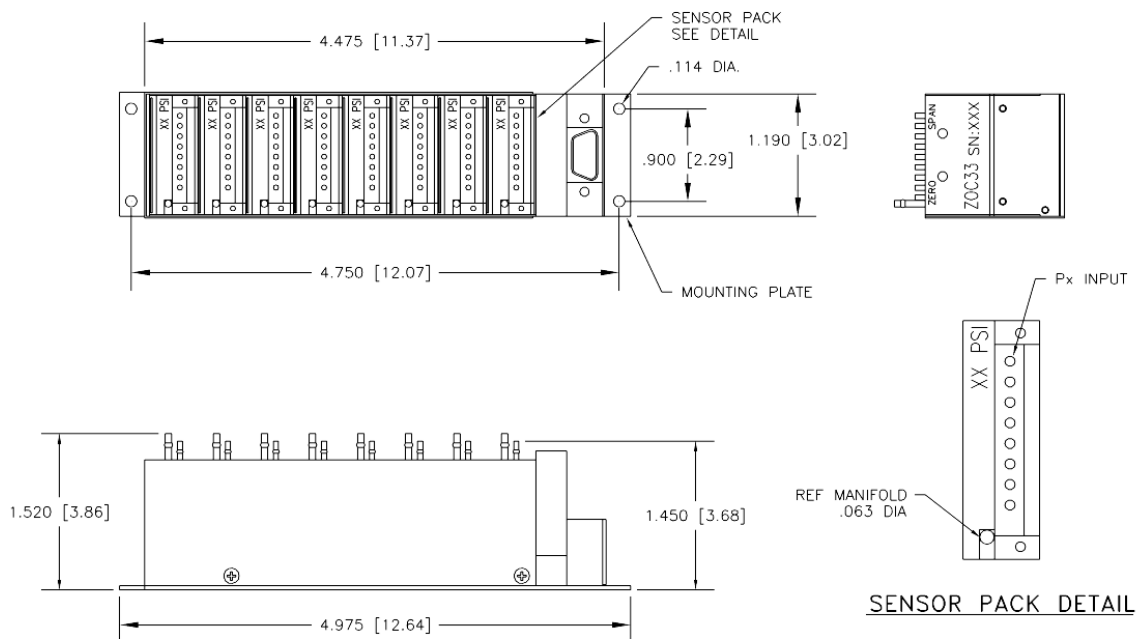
ZOC33/64Px VALVELESS DIMENSIONS [INCHES(CM)]
